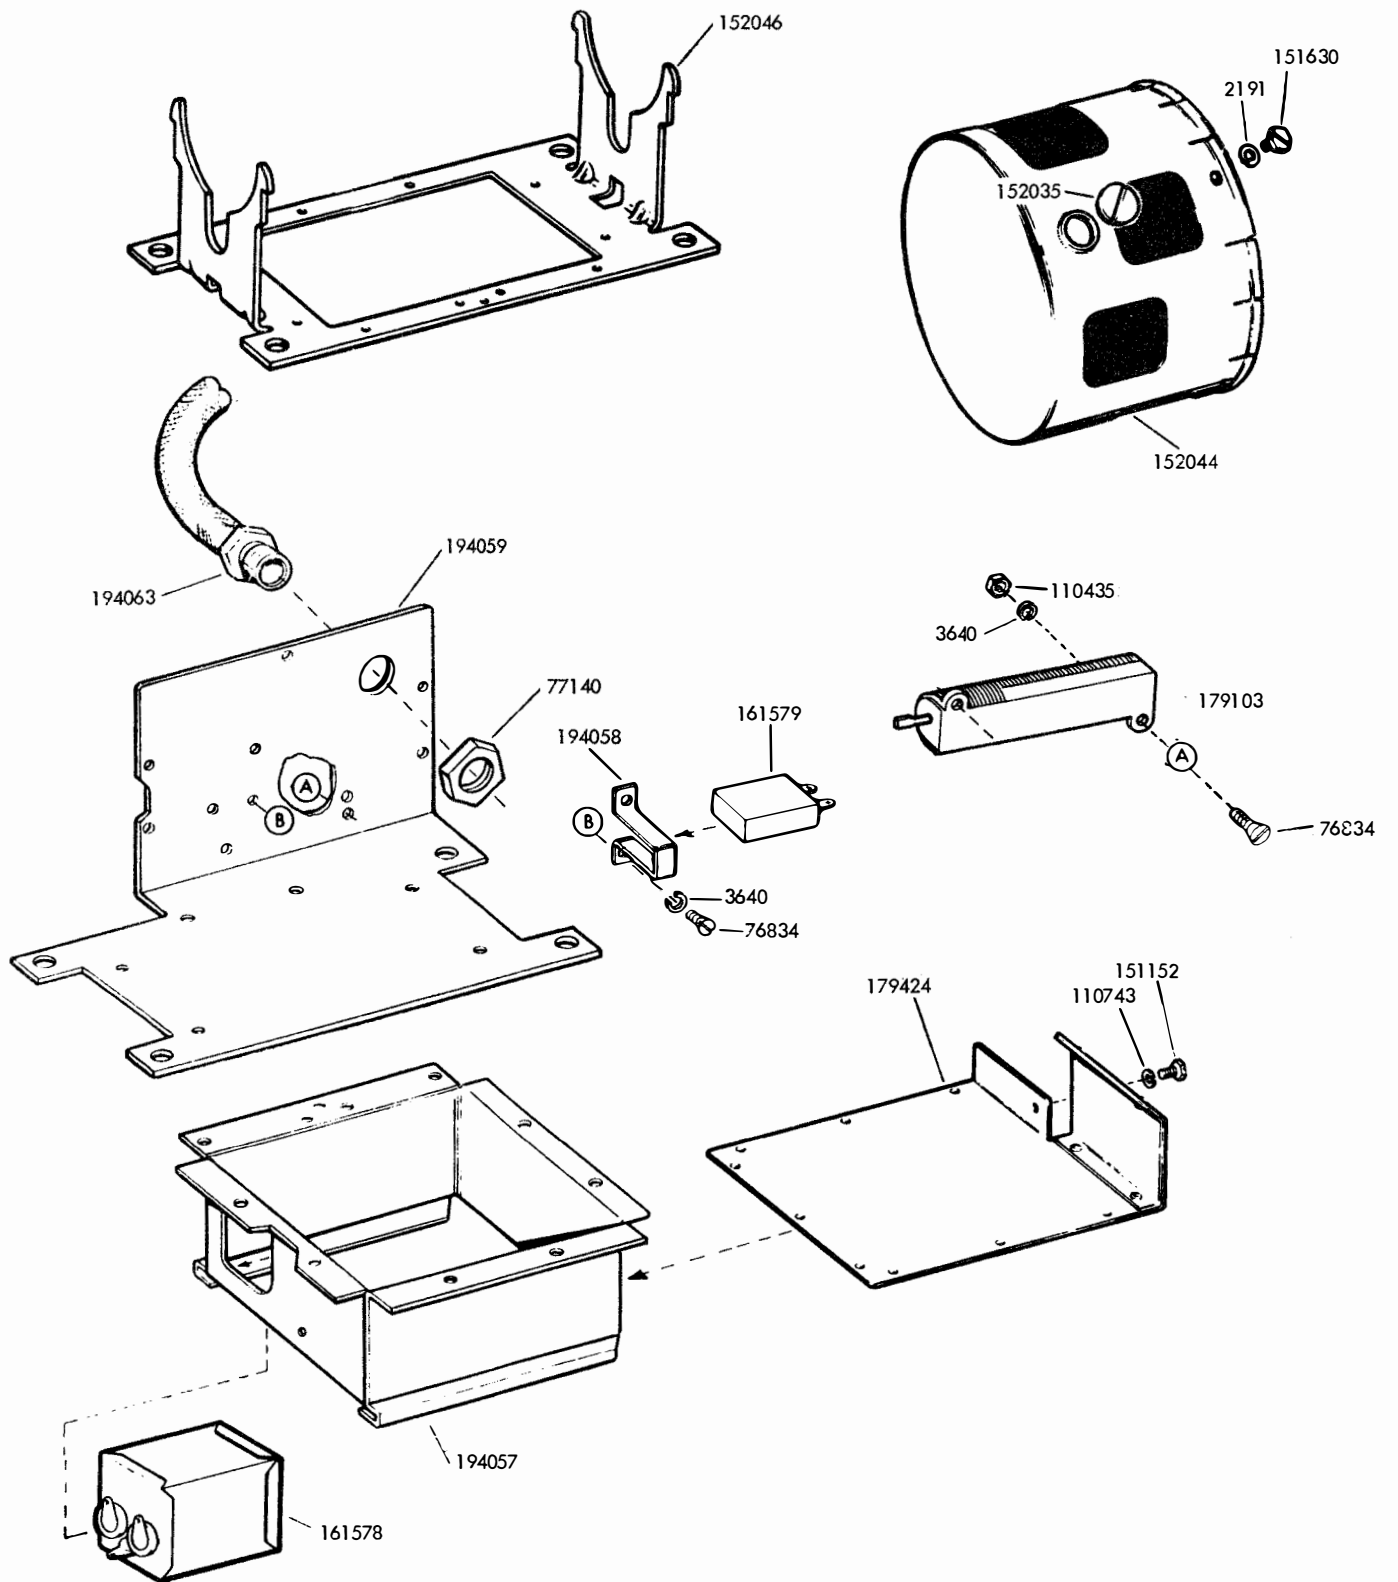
SERIES MOTOR MOUNTING PARTS WITH RF SUPPRESSION
